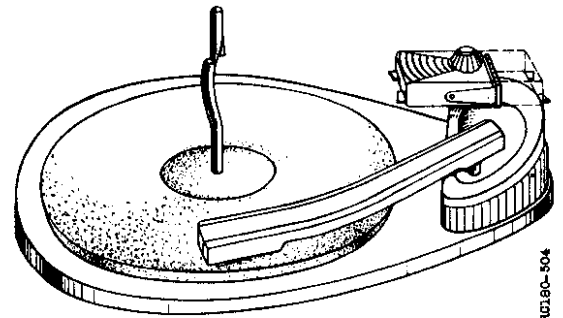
B - Record Changer RC180, Top View Showing Pear-Shaped Pan.
